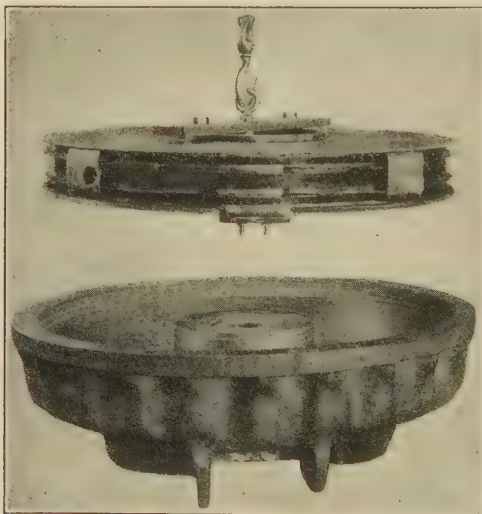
Lifting magnet being assembled. (Courtesy The Cutler-Hammer Mfg. Co.)
